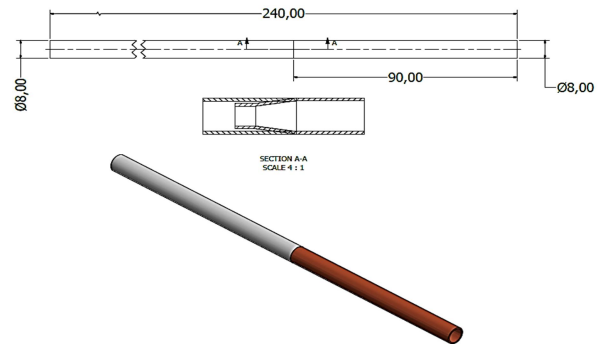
Dimensions of aluminum and copper pipe with eutectic connection.
